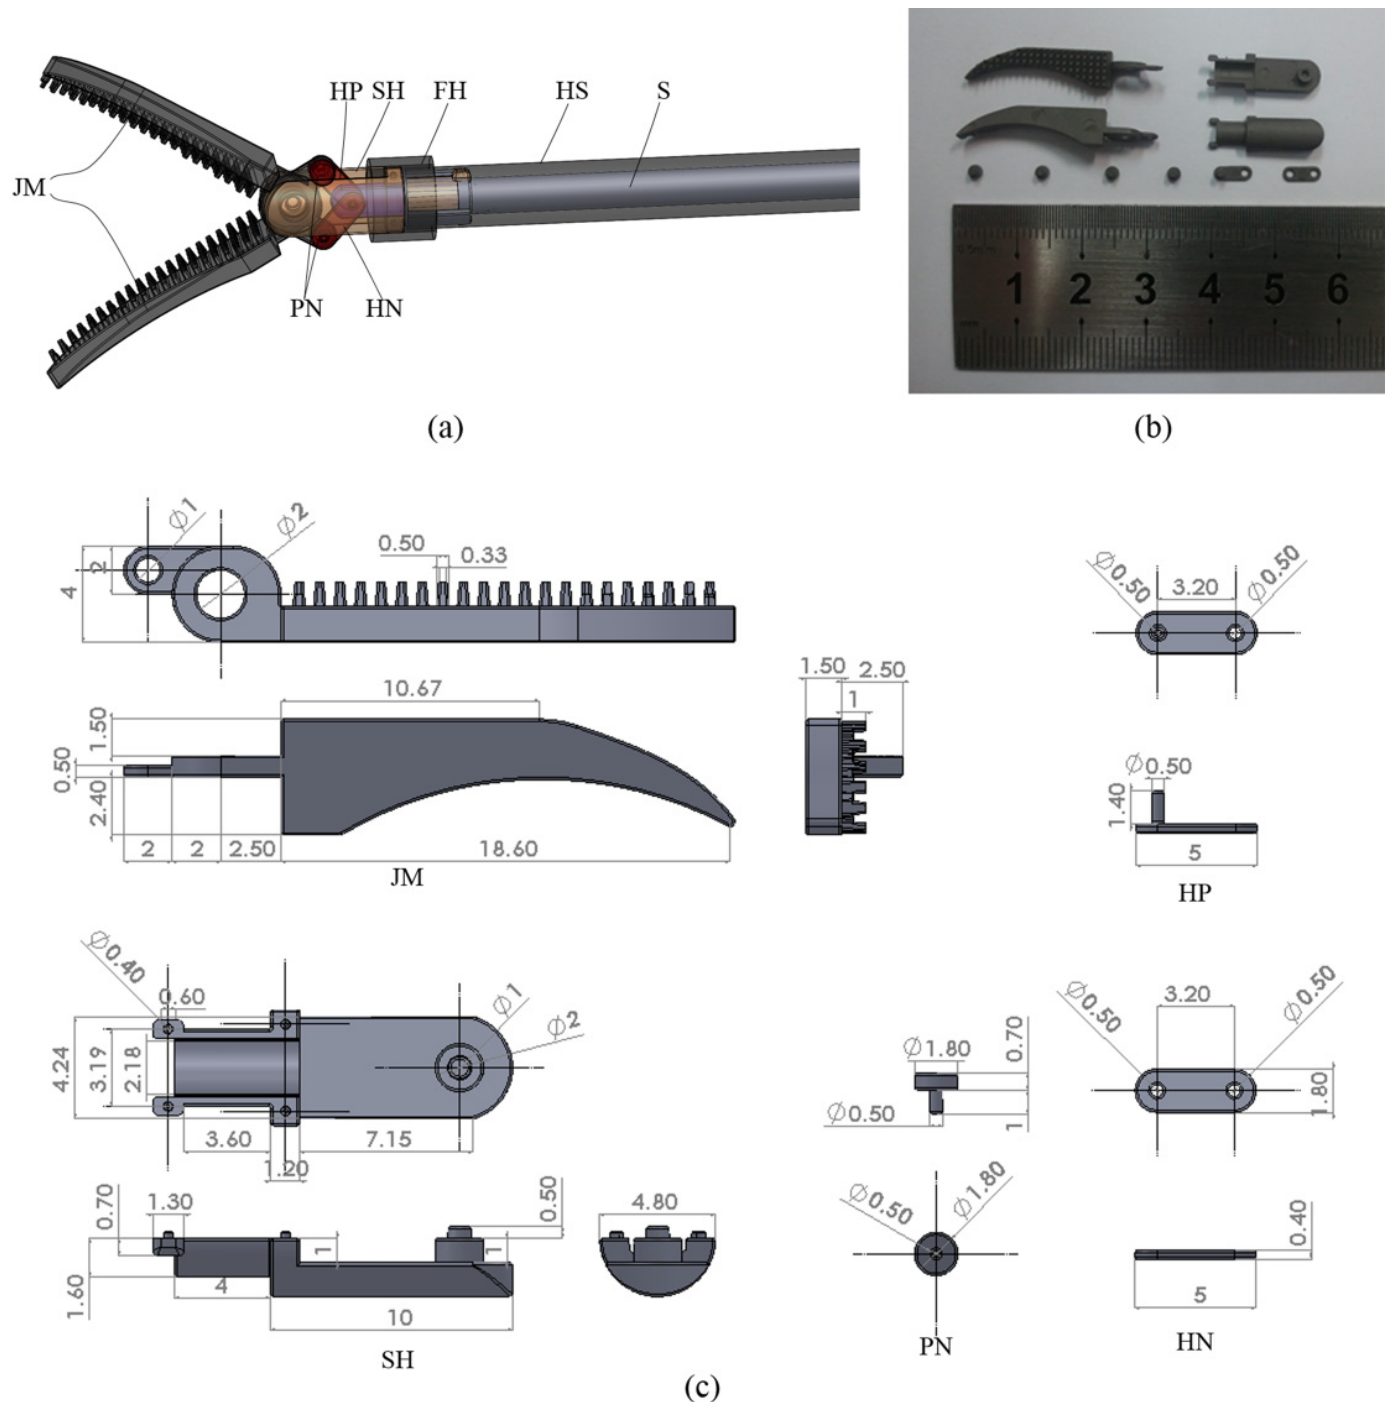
Design of micro-forceps for laparoscopic operation, (a) cross-sectional CAD image JM: jaw members, SH: side holder, FH: forceps holder, HP: hinge pin, HS: hollow shaft, S: shaft, PN: pin, HN: hinge, (b) injection molded components, (c) dimensions of each component
